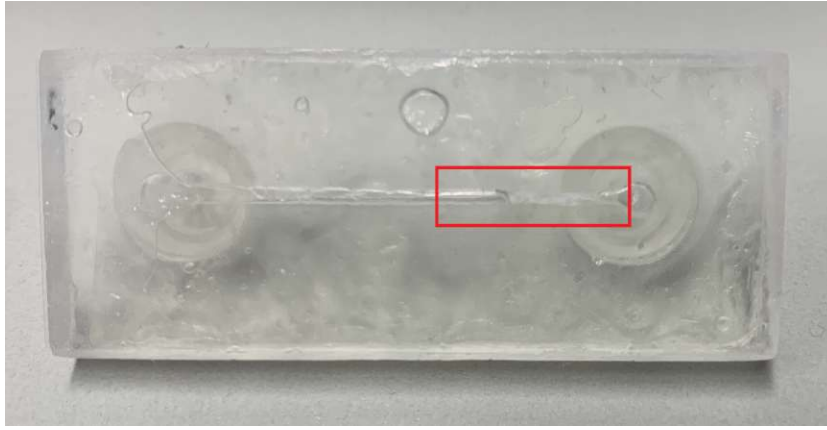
The red rectangle highlights the part of the channel, which got clogged with glue. This happened during the process of gluing the microscope slide onto the channel and not being careful enough.
